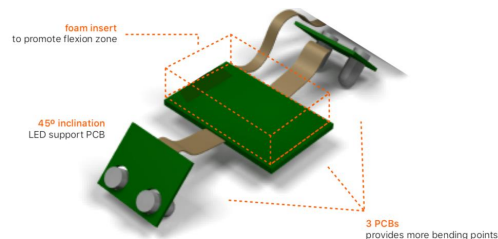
fNIRS acquisition unit PCB design with 3 PCBs to provide more bending points enabling curved form factor.
